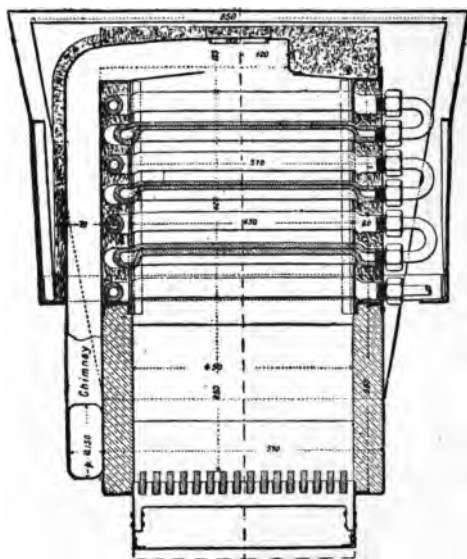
Serpollet Steam Generator (Longitudinal Section).
